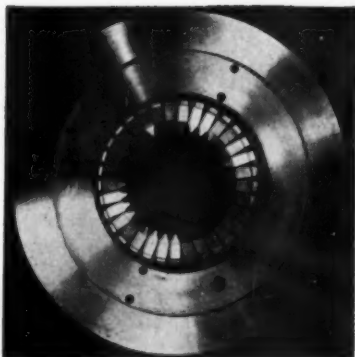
Interior of cutter head, showing assembly of individual simple form tool blades—each responsible for removing the metal between two adjoining teeth in a gear. The cutter head shown is for a 50-tooth 4" diameter gear.
